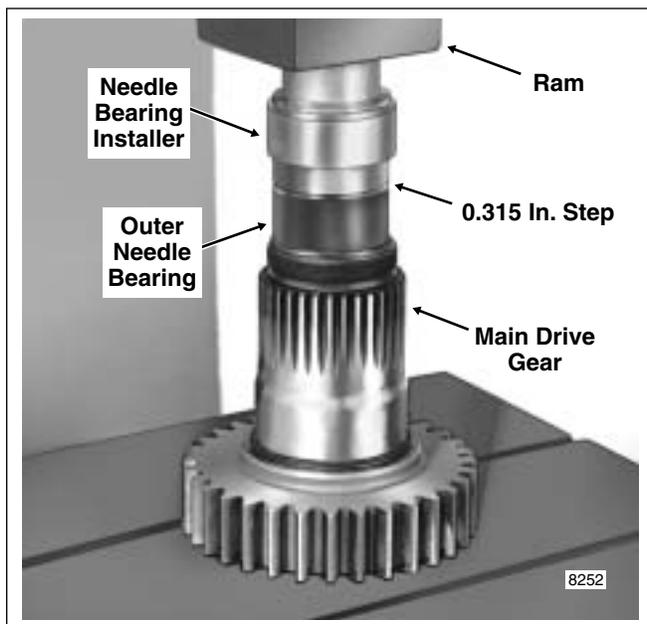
Press Clutch Side Needle Bearing into Main Drive Gear
